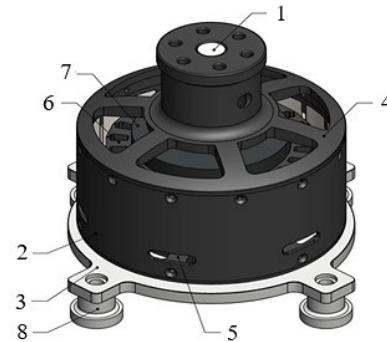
BLDC motor components: 1 – shaft; 2 – cover; 3 – holder; 4 – upper cover; 5 – lower cover; 6 – roll place; 7 – roll place; 8 – bracket spacer
